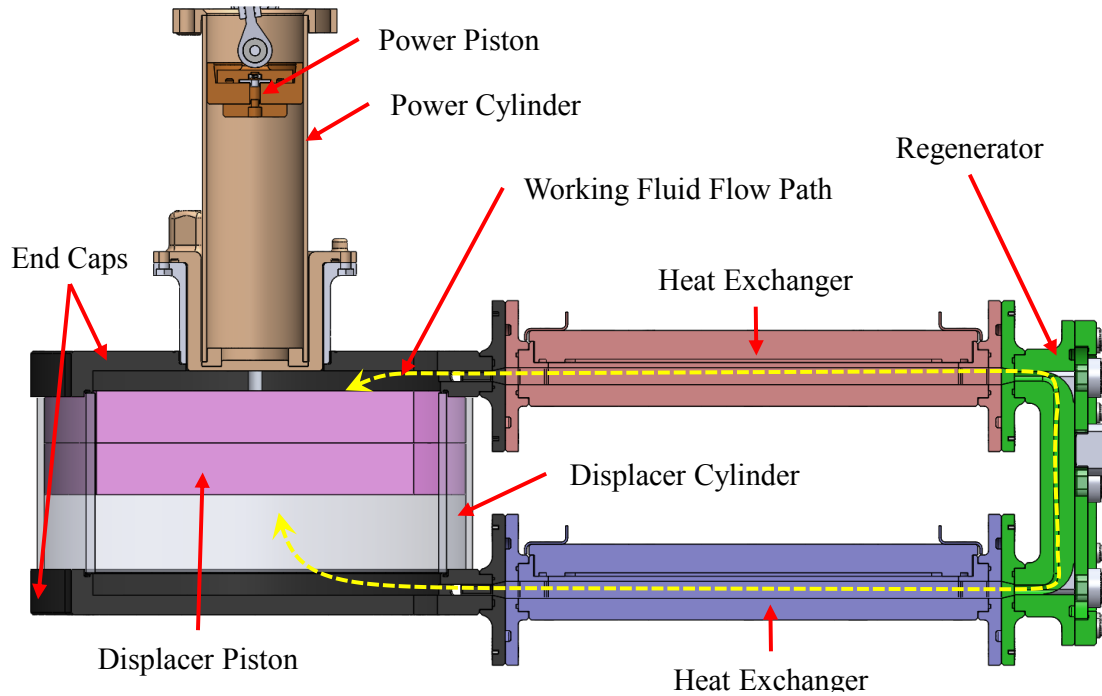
Section view of the Mark 2's solid model that shows its internal systems.
